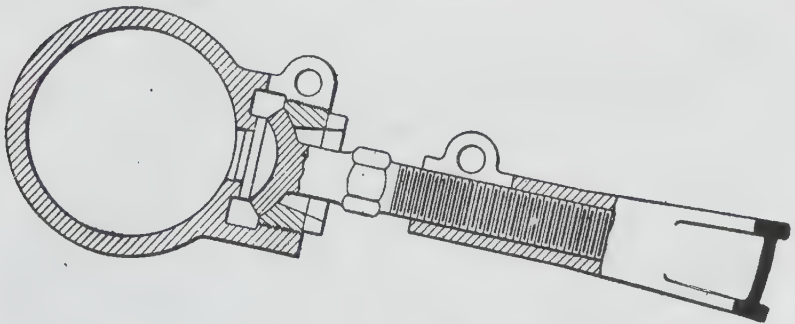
RADIUS ROD SPHERICAL FORWARD JOINT.
